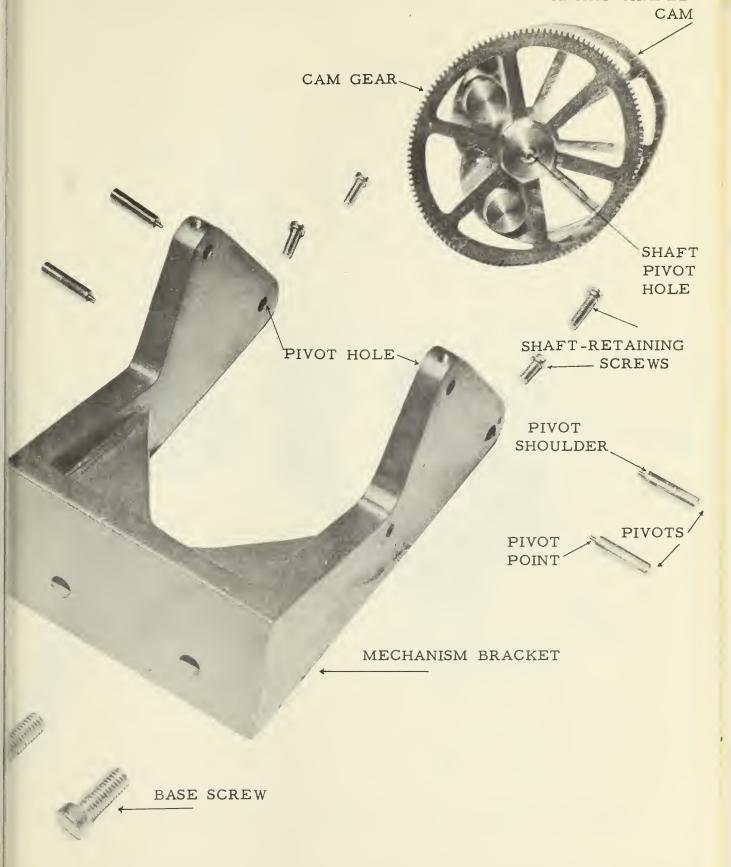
Type A. Mechanism bracket and cam gear, detail of parts.
